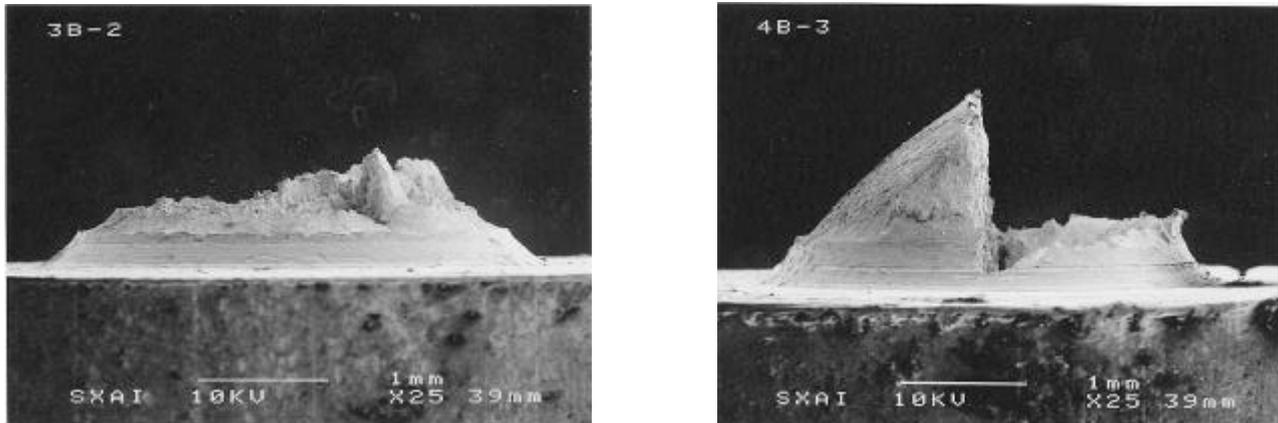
Fracture profile of notch B (maximum depth; minimum radius) and steels 3 (left) and 4 (right).
